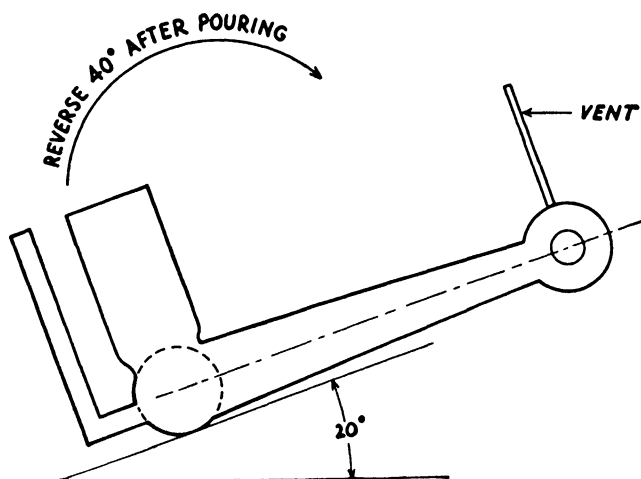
Cross section of a 20,000-lb. stockless anchor. Partial-reversal mold manipulation. (Duma and Brinson.⁽¹⁸⁾)
